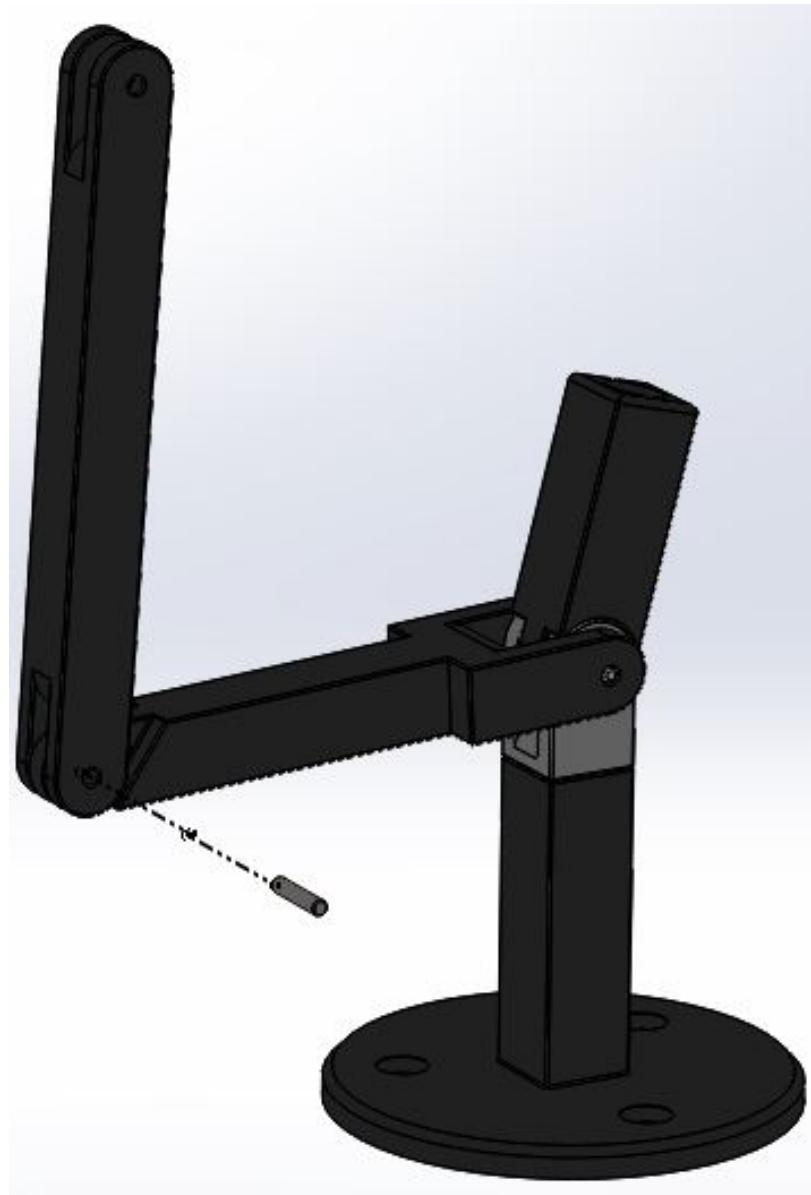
Rodriguez, Juan: Assembly Step 3
